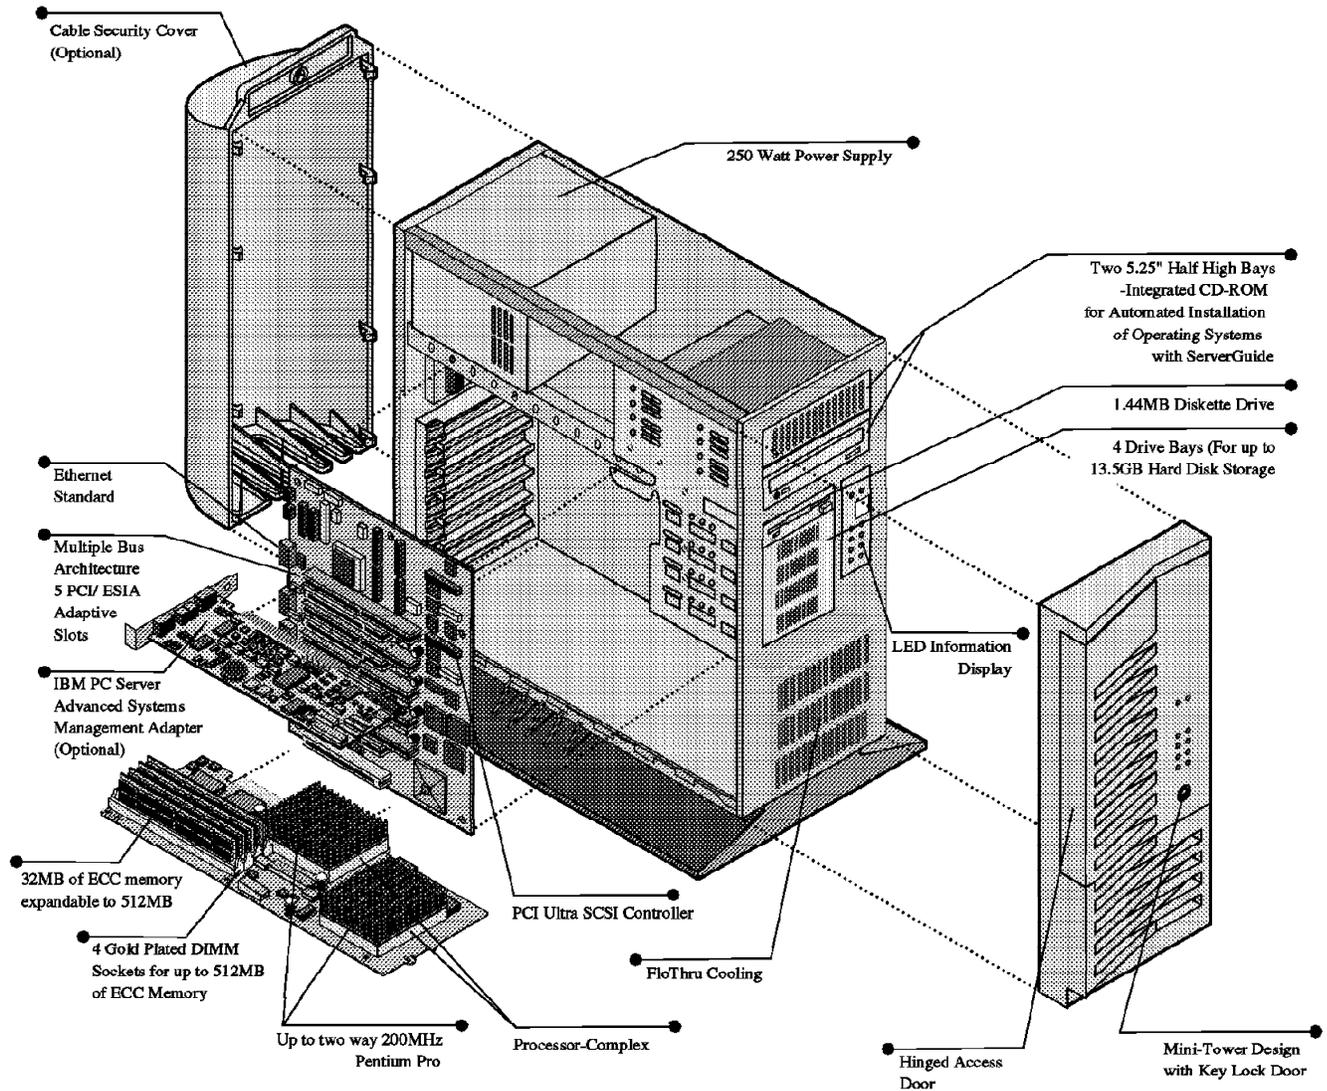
Exploded View of the IBM PC Server 325 Mini Tower Model
